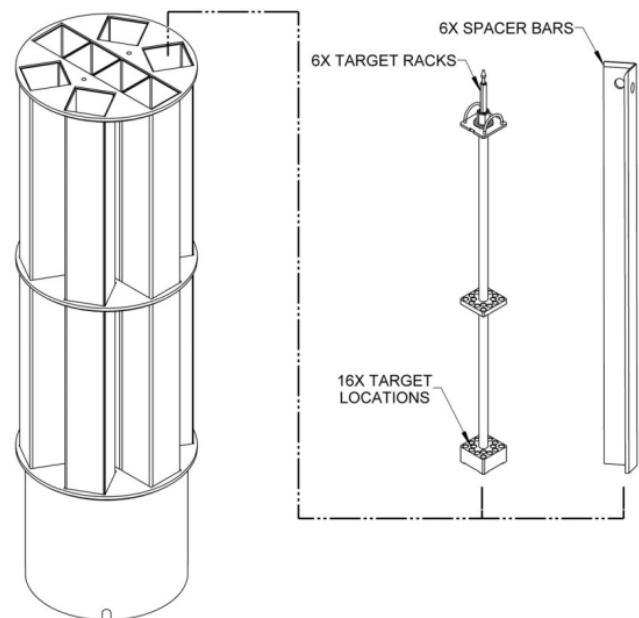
BRR payload insert structure capable of holding six target racks.[22]
